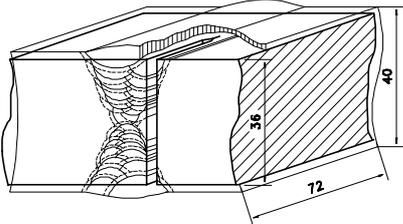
Location of fatigue pre-crack tip in the welded joint
